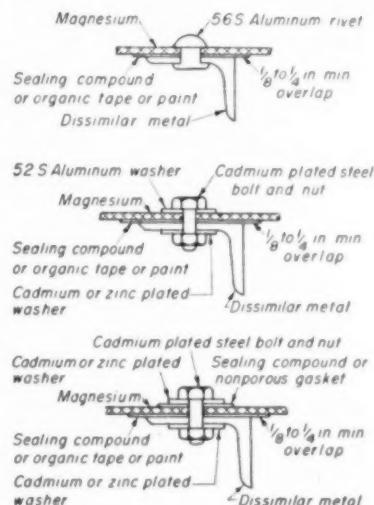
Alternative Methods of Riveting and Bolting Magnesium to Dissimilar Metal or Wood
